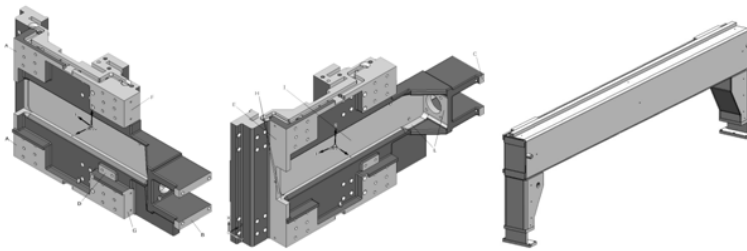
The left and middle pictures show, in clear grey, the faces machined for the P0911P0064 component. The right figure shows the 0610P0081 carpentry
